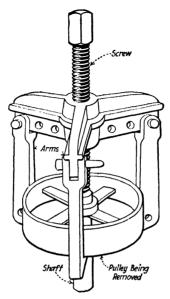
A three arm pulley or pinion puller. (Hammacher Schlemmer Co., Puller No. 3.)
